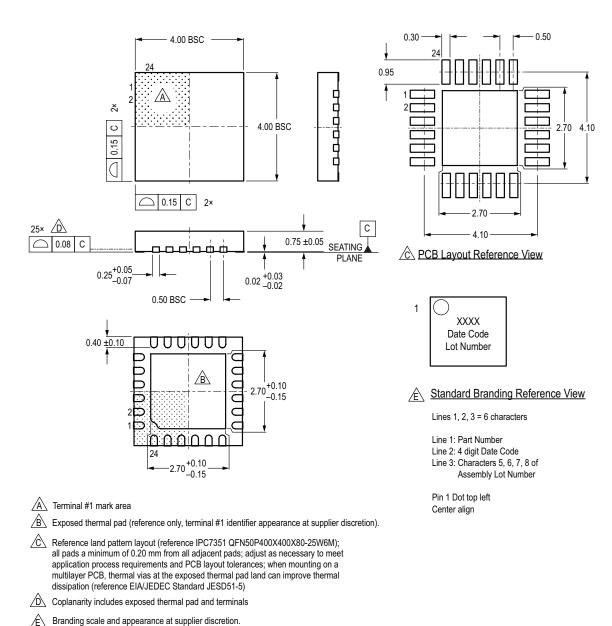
Package ES, 24-Contact QFN with Exposed Pad
